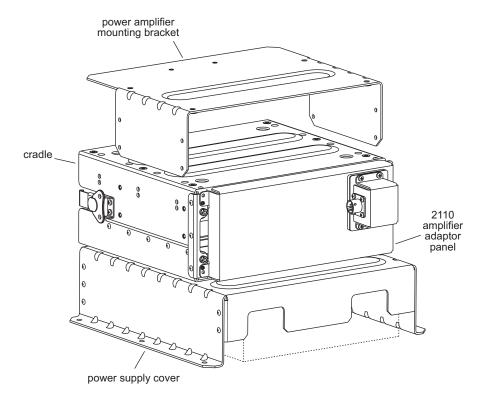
Power supply cover, cradle, and power amplifier mounting bracket
